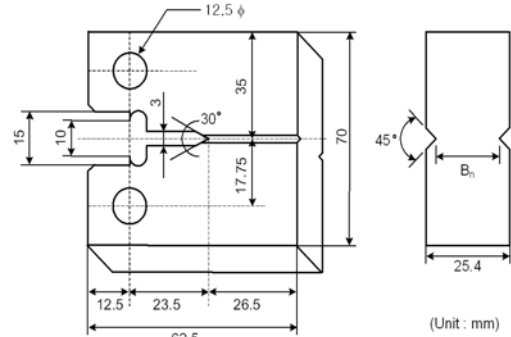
Dimension and configuration of CT specimen for STS 316L
